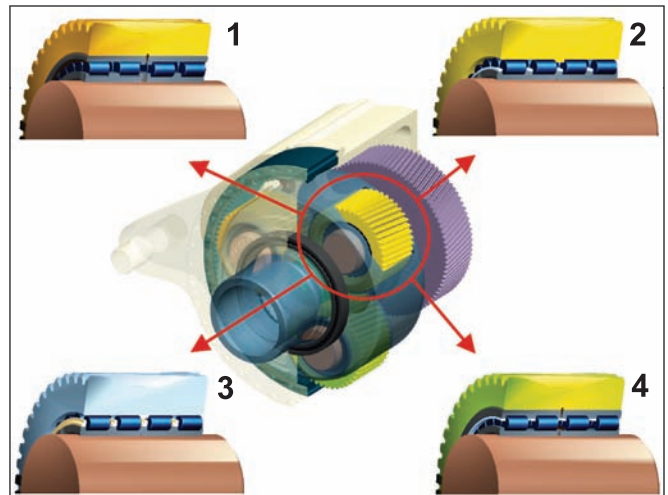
(1) Full-complement bearing; (2) HCCRB version JB; (3) standard CRB with brass cage; (4) HCCRB version JA.
